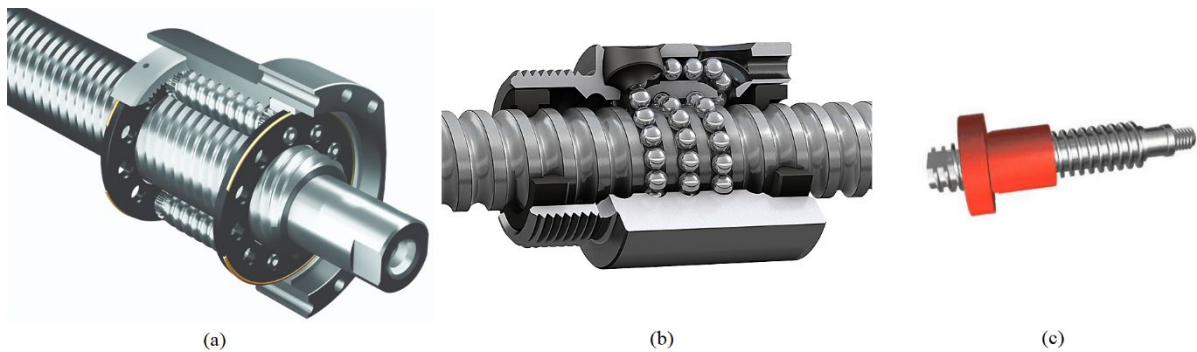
(a) Roller screw [10] (b) ball-screw [14] (c) leadscrew [15]
